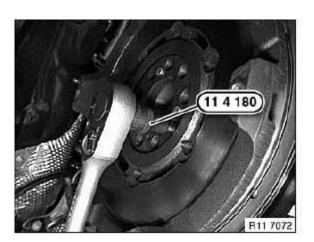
Releasing Flywheel Screws With Special Tool (11 4 180)
